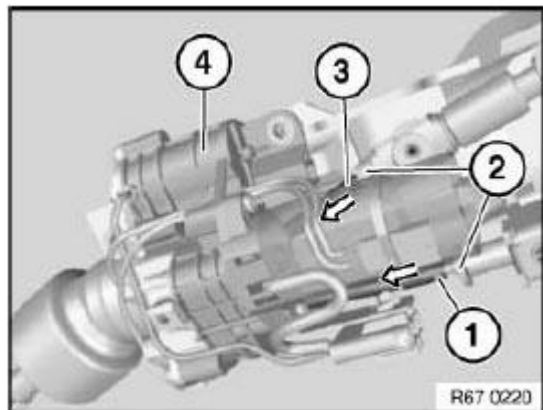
Identifying Drive Shafts, Electric Steering Column Adjustment And Associated Mountings
